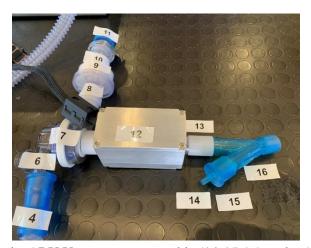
Connecting the ABU Y-connector ensemble (14-15-16) to the ABU sensor Y-connector fitting (13).
